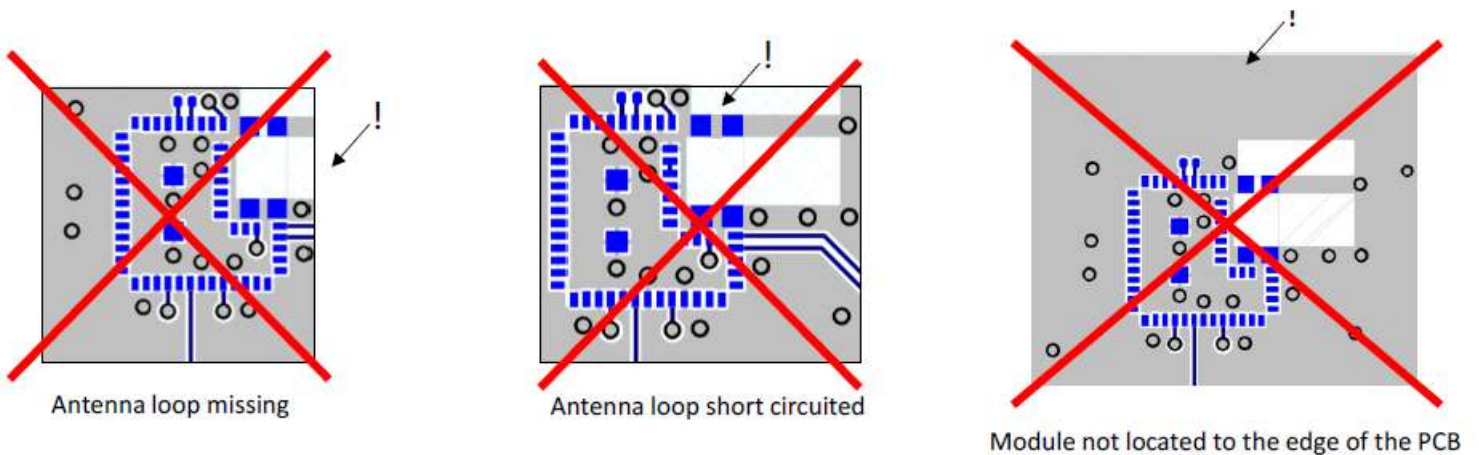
Poor Layout Designs for the BGM121/BGM123
